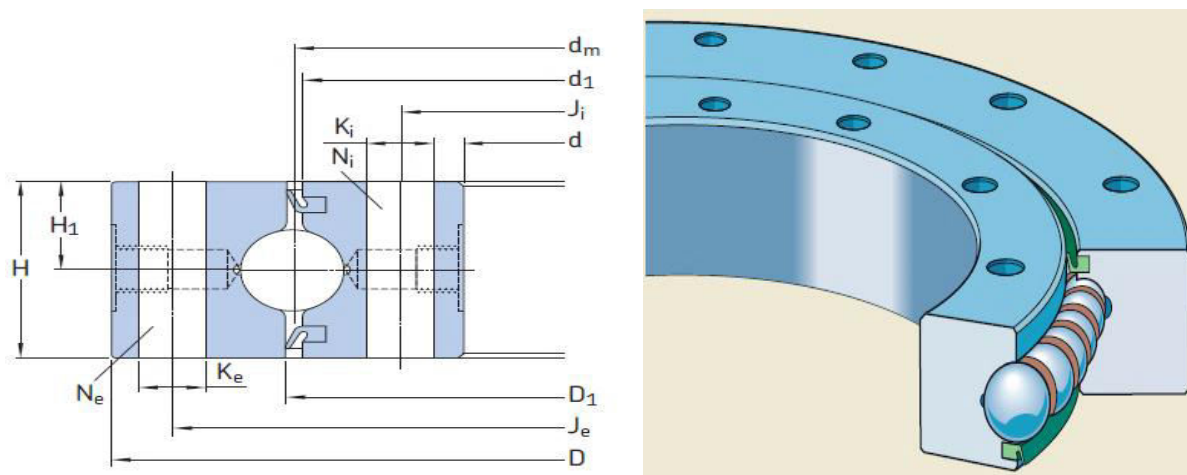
Geometry of the medium size four-point contact ball slewing bearing [207]
